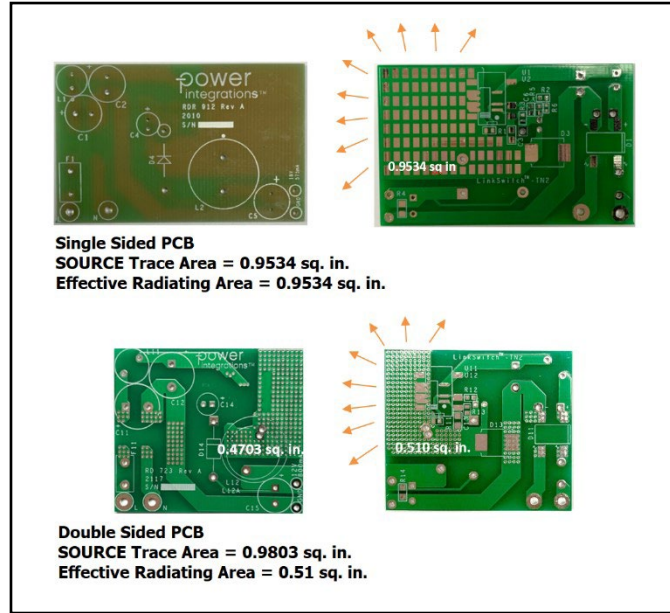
Single Side PCB and Double Sided PCB with the same SOURCE Trace Area.
